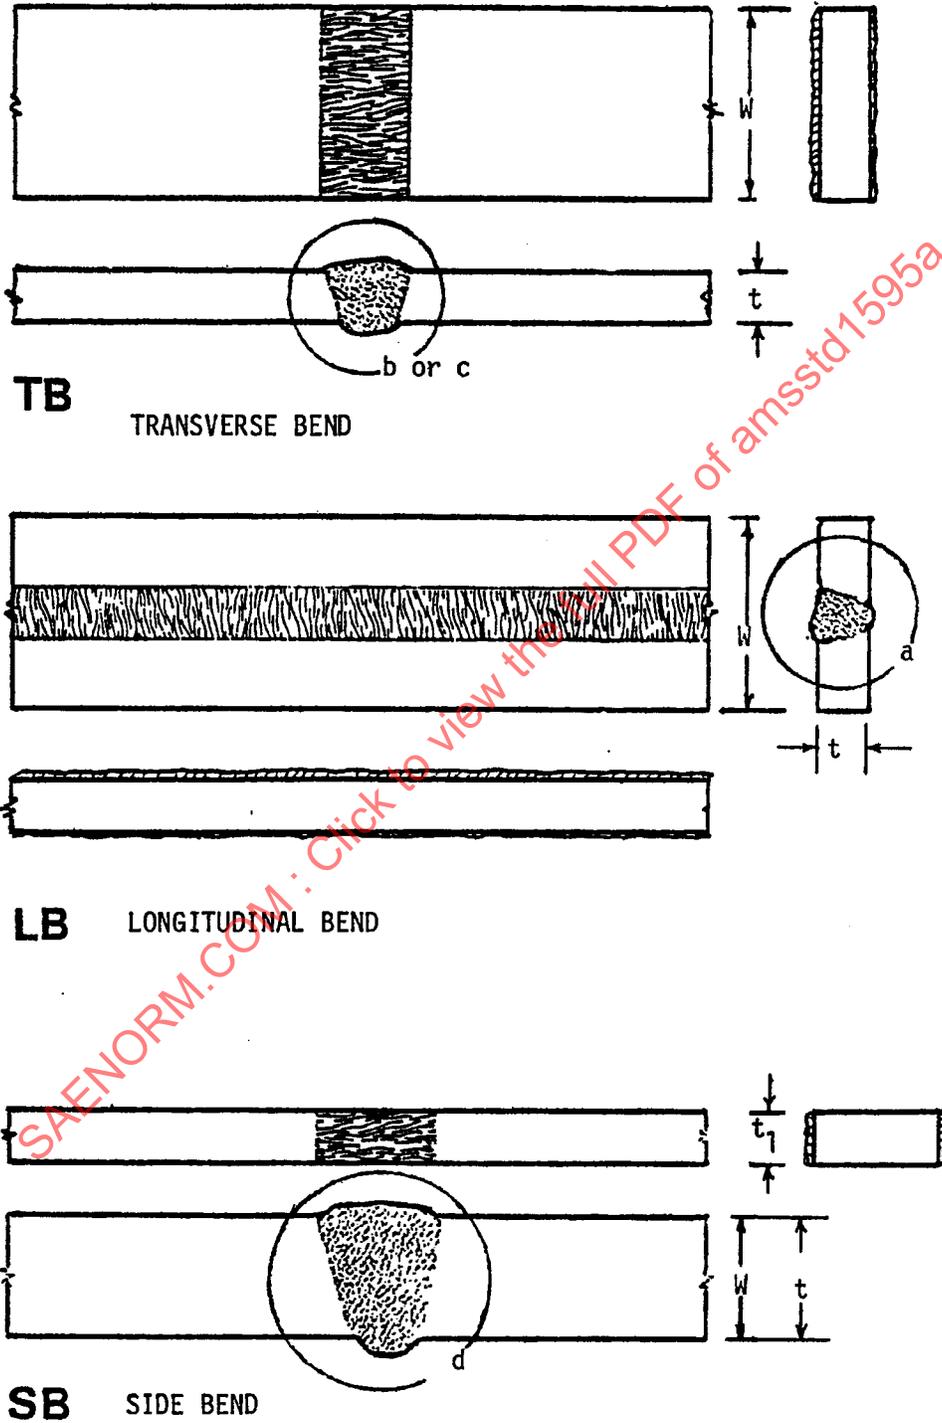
Bend specimens in groove-welded sheet.
